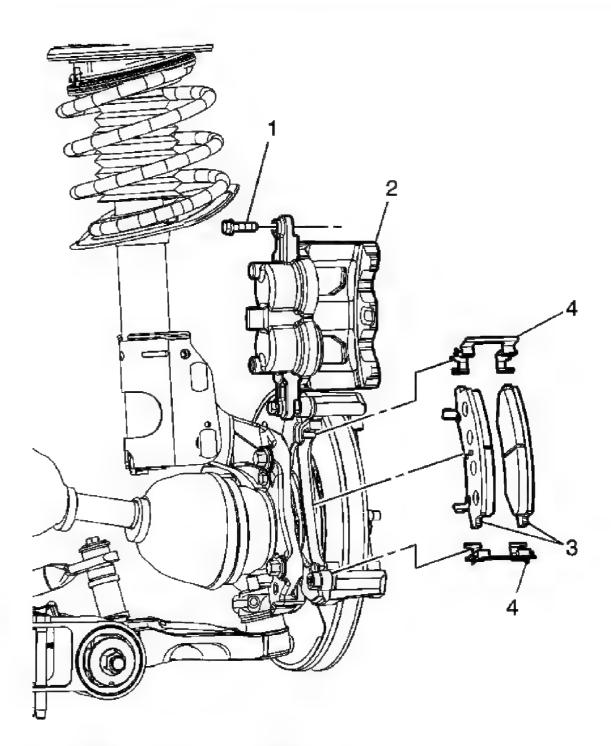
Replacing Front Disc Brake Pads Courtesy of GENERAL MOTORS CORP.
